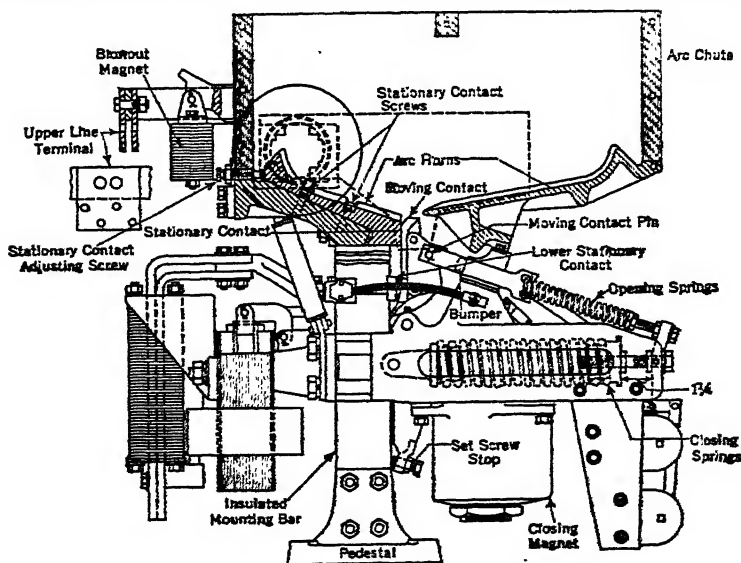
Sectional Elevation of a High-speed Breaker, Showing Arrangement of Parts
